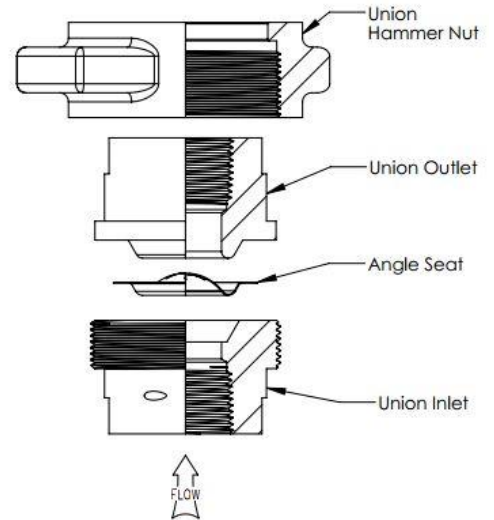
Angle Seated Disk w/ Hammer Nut Union Type Holder
